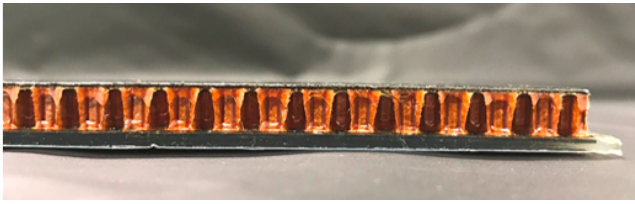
Visual inspection of the composite lightweight module produced using a good sandwich adhesive.
